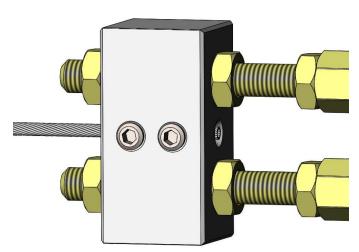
Single Adapter Cable Installed in Aluminum Attachment Block
